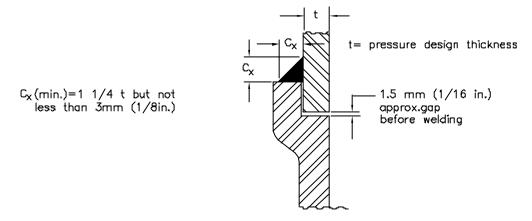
,5,2C MINIMUM WELDING DIMENSIONS FOR SOCKET WELDING COMPONENTS OTHER THAN FLANGES
